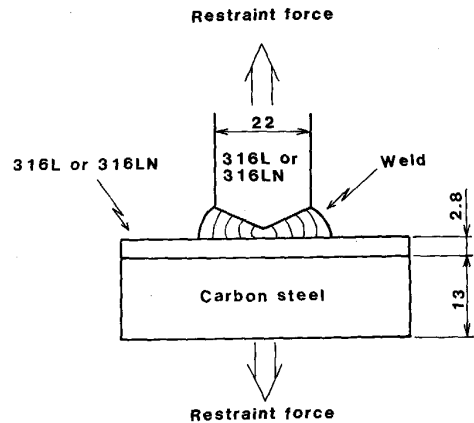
T joint welding of SUS316L and SUS316LN clad steels.
